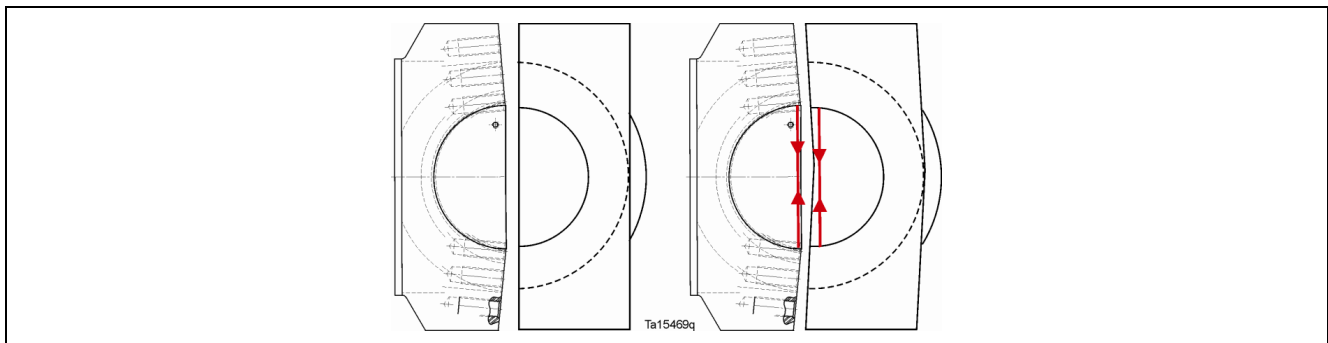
Both cap and socket tighten up when cap placed on a warped socket
